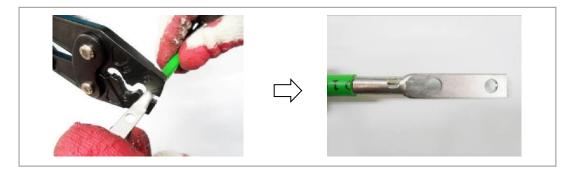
Fixing Pressure Terminal_Handheld Compressor (3)
